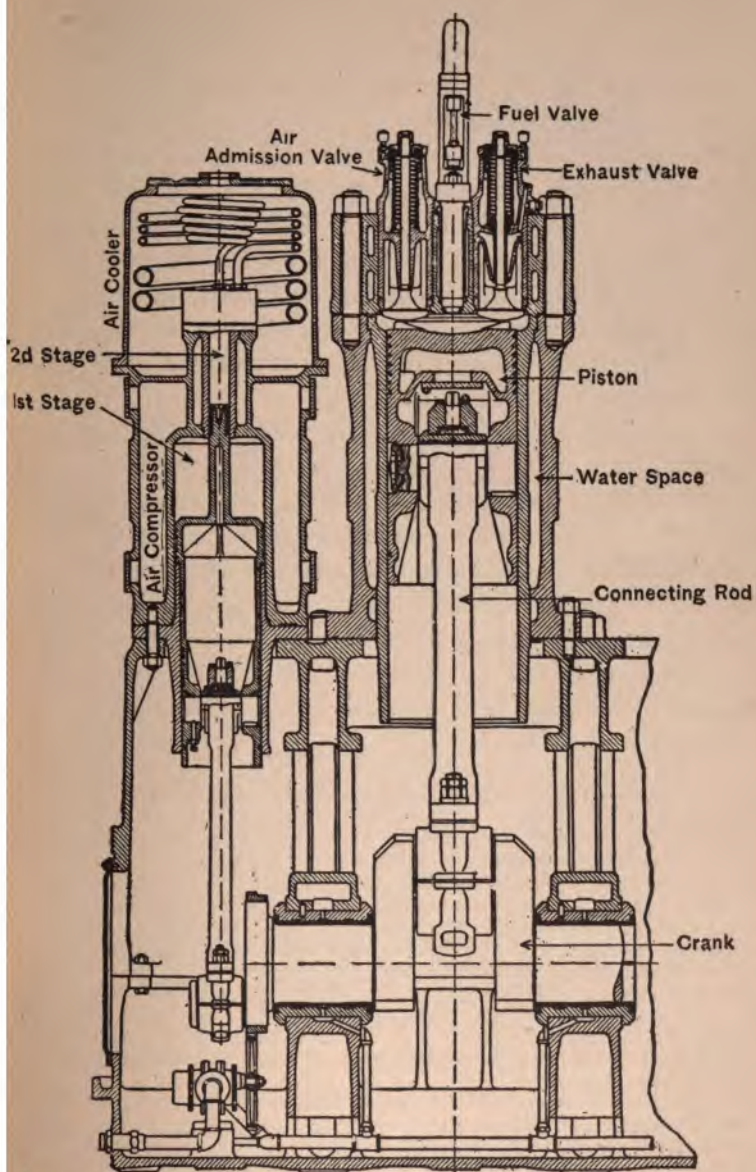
Section of Diesel engine showing one cylinder and a 2-stage air compressor directly connected to crankshaft
